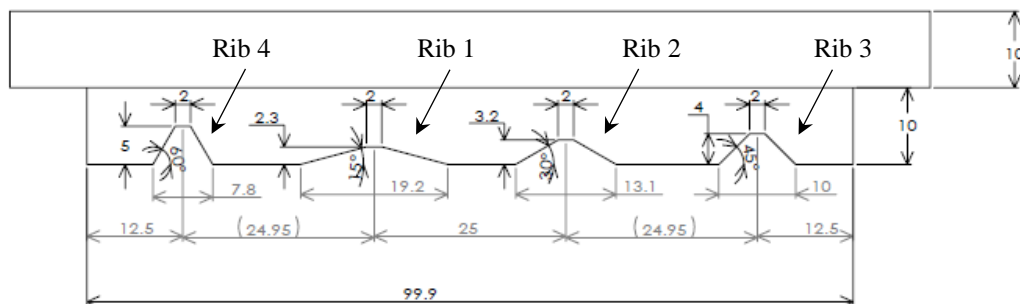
Drawing of upper die for complex shaped specimen with four ribs.
